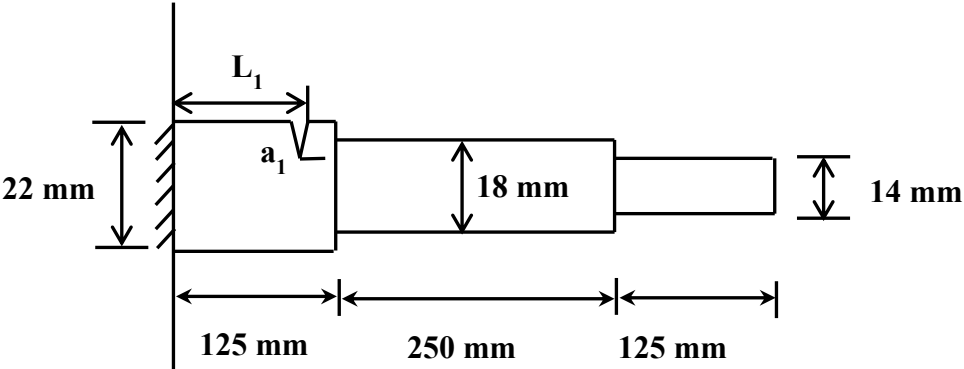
Sketch of two stepped cantilever beam of rectangular cross-section with single crack
